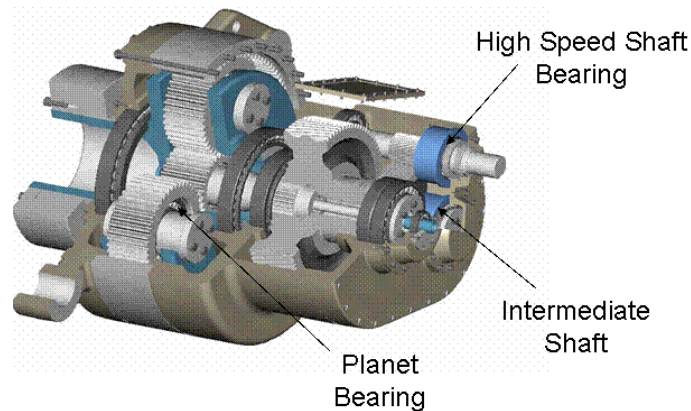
Schematic illustration of wind turbine gearbox indicating bearing positions (2)
